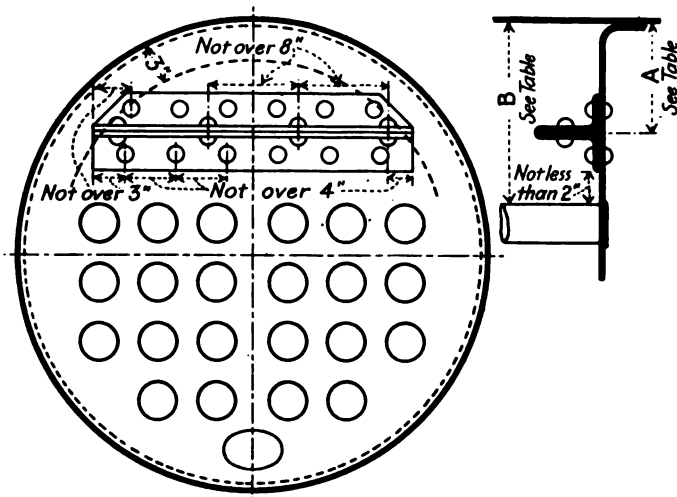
STAYING OF HEAD WITH STEEL ANGLES IN TUBULAR BOILER
